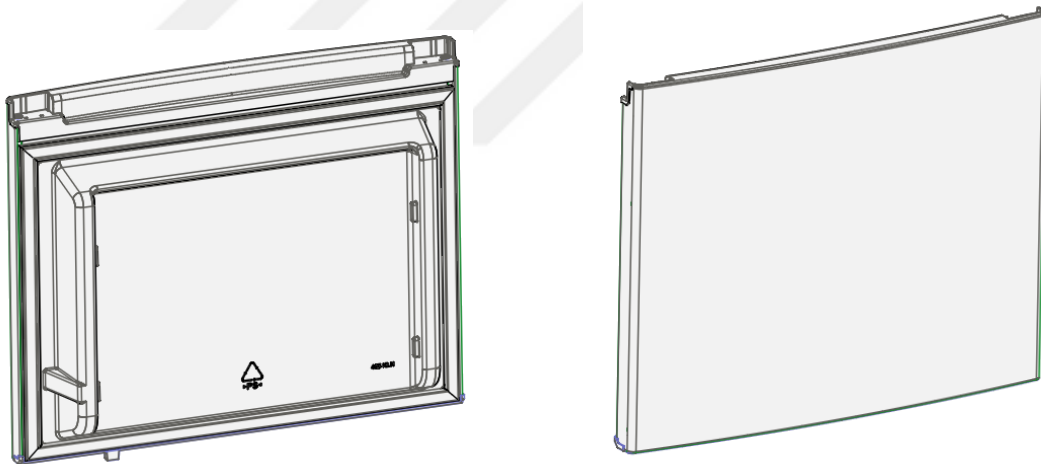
3D ASSEMBLY VIEW OF REFRIGERATOR DOOR
